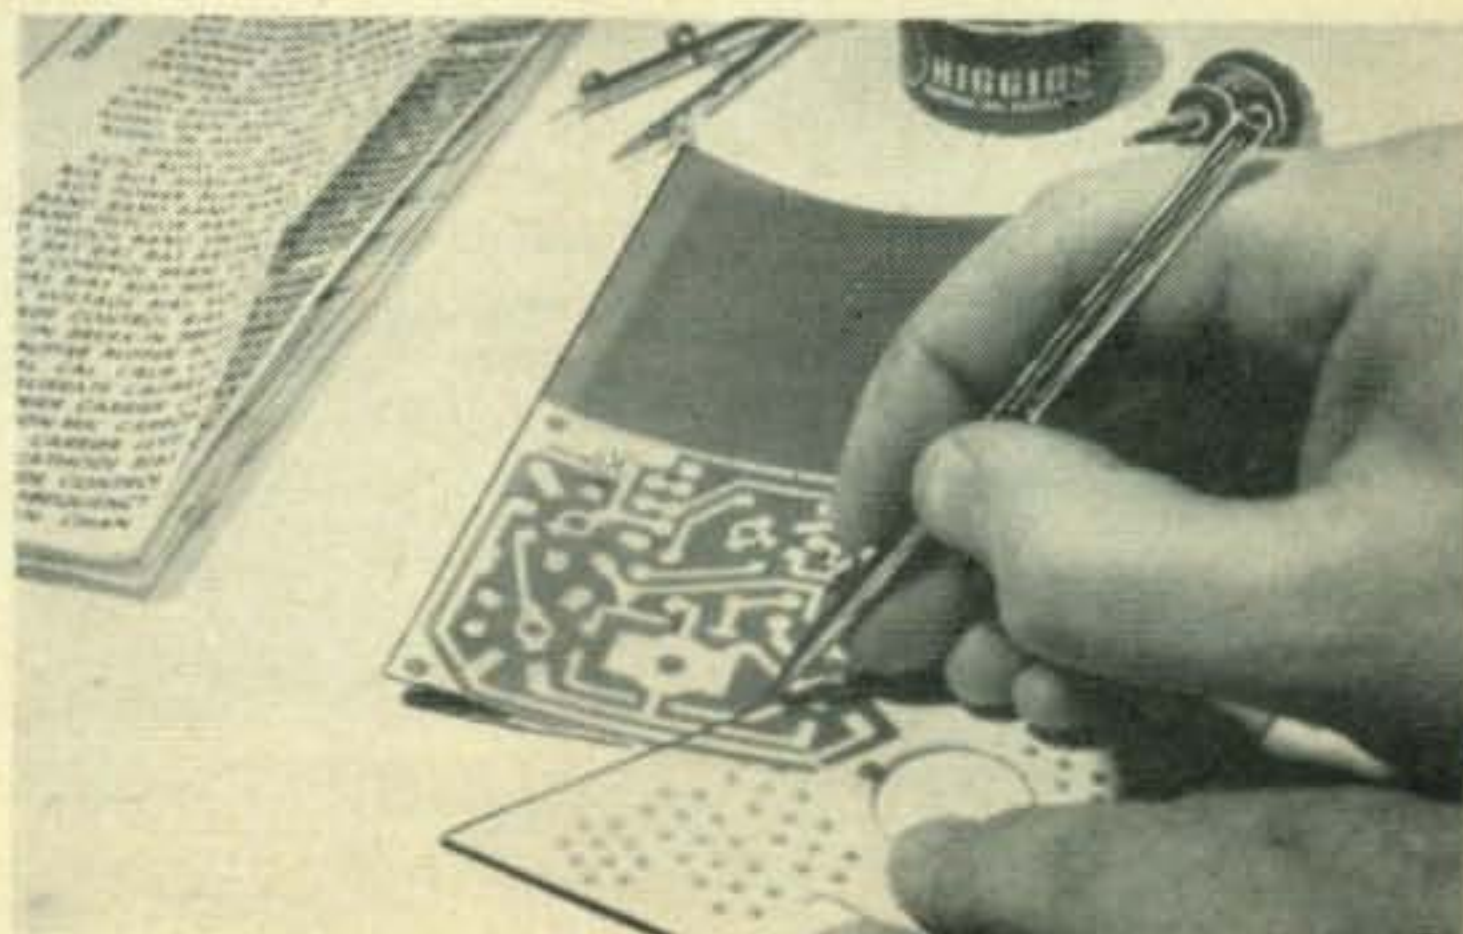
Transferring Pattern from Full Size Drawing to the Ruby Cutting Film
